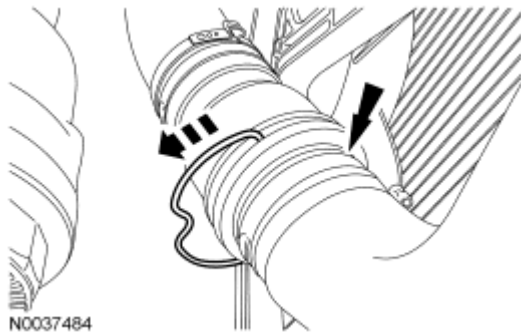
Removing Retaining Clip And Locating Lower Radiator Hose
